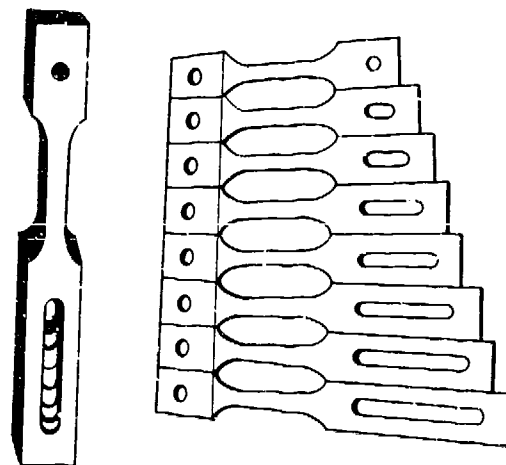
Multiple Tensile Specimen Arrangement (GD/A)
